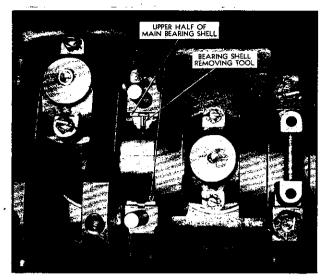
Removing Main Bearing Upper Shell with Tool as Shown (Except Rear Main)—Cranshaft in Place.
